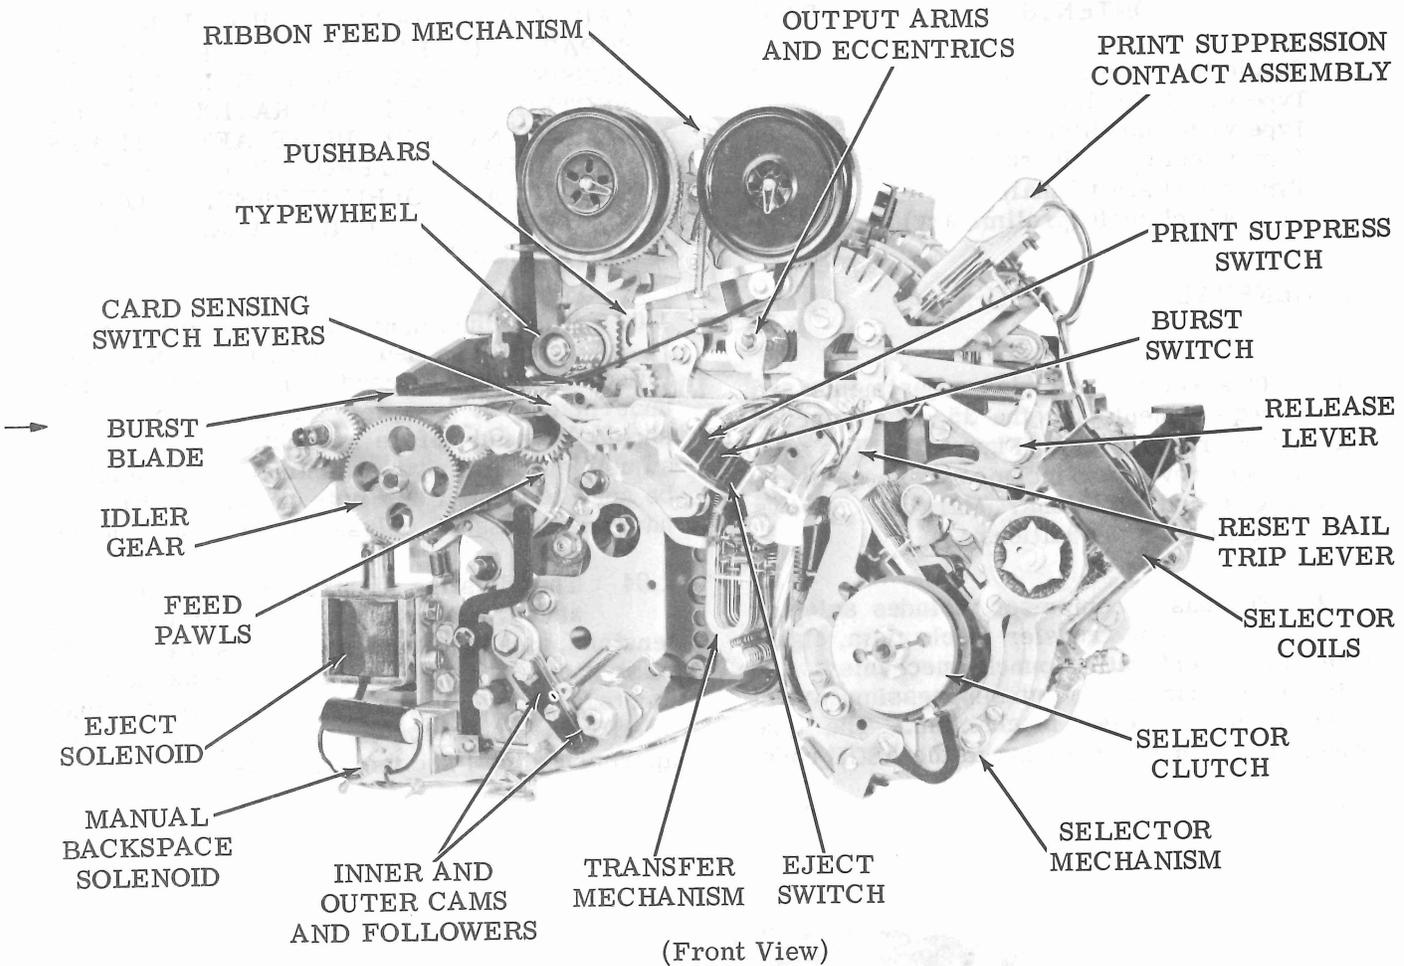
35 Edge Punched Card Typing Reperforator (Without Top Plates)
